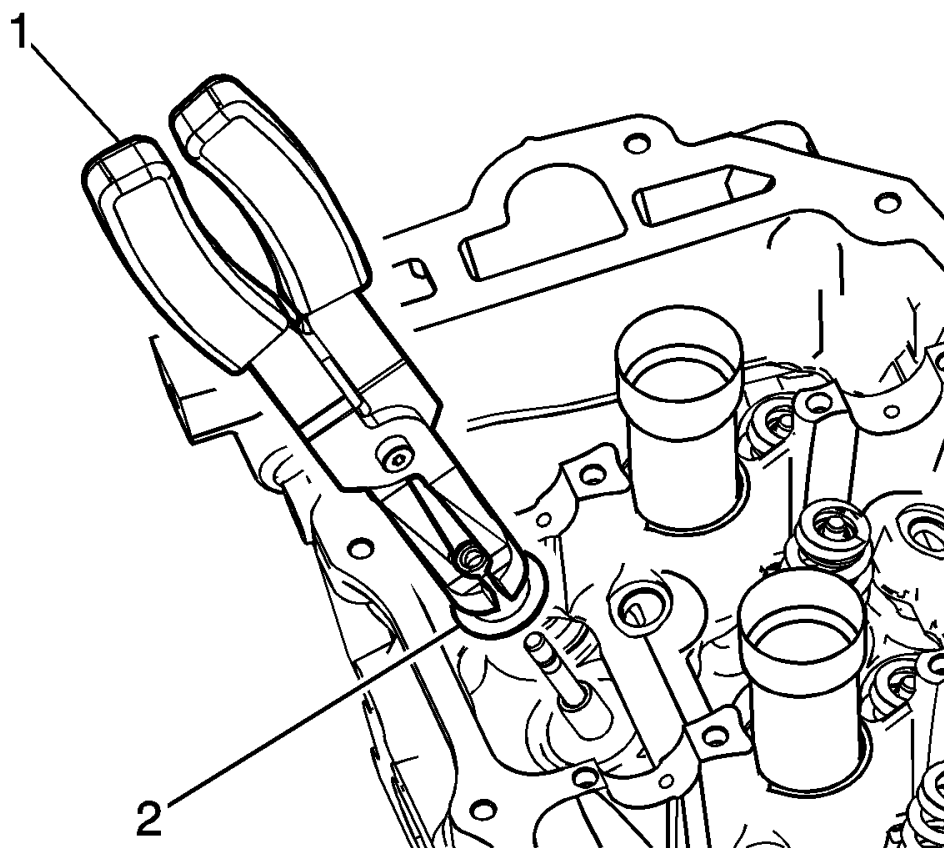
Identifying Special Tool - EN-46116 & Valve Stem Seal
